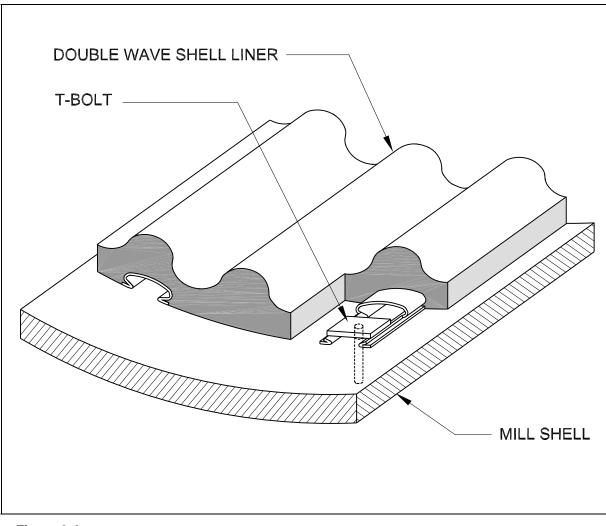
Cross-section View of a Double-Wave Shell Plate Liner
